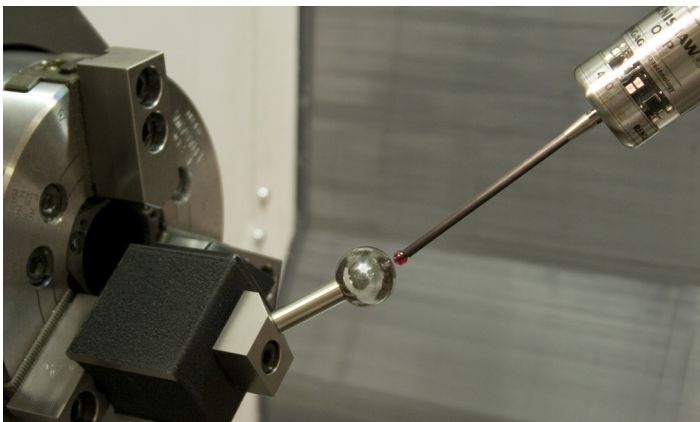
A machine tool probe measuring an AxiSet™ sphere in order to check rotary axis pivot points
